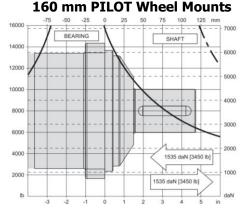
160 mm PILOT Wheel Mounts Allowable shaft load/ bearing curve
